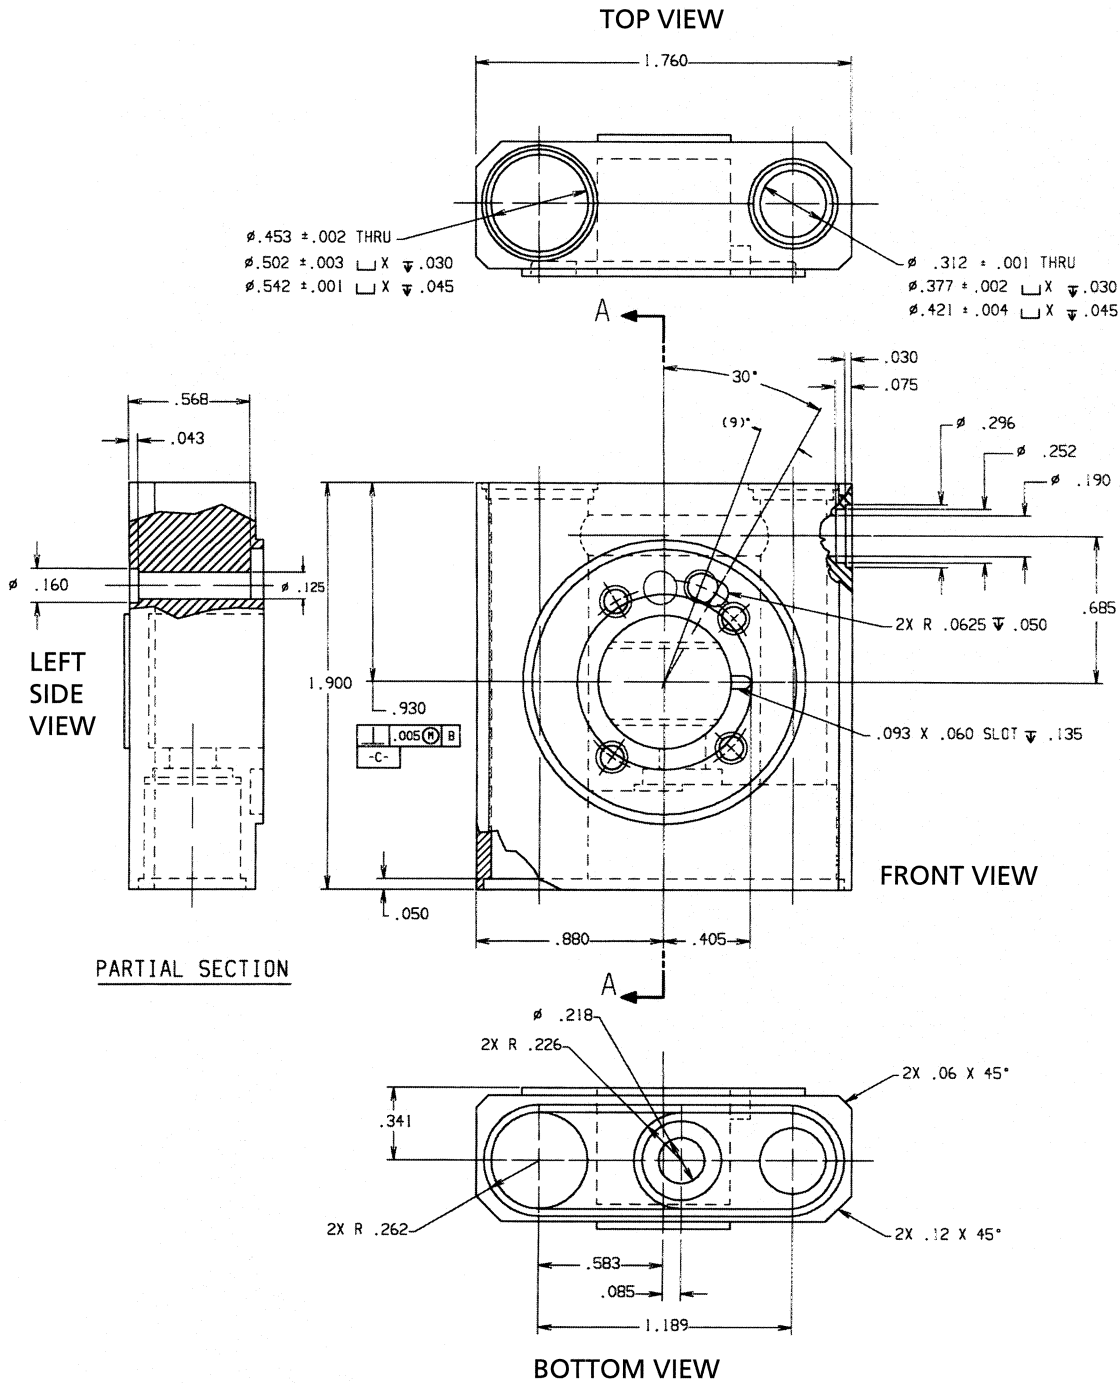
Detail of a Mechanical Part with Three Sections
